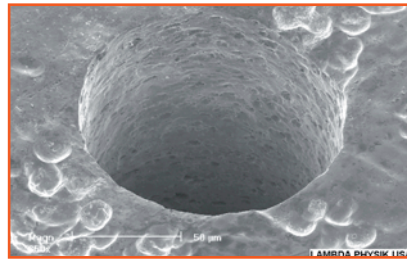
Close-up view of hole trepanned in 0.75 mm-thick carbon steel with 4W UV beam.
